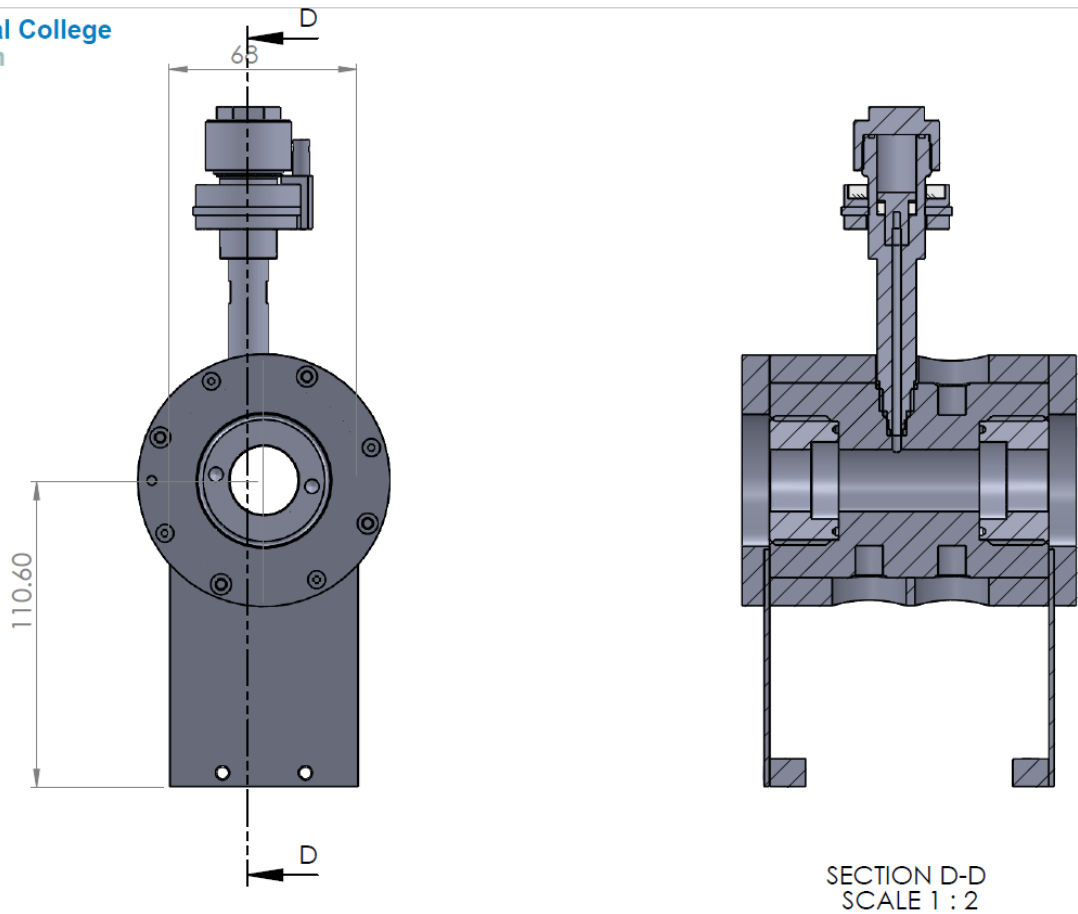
Assembly of the view cell with the magnetic manipulator.
